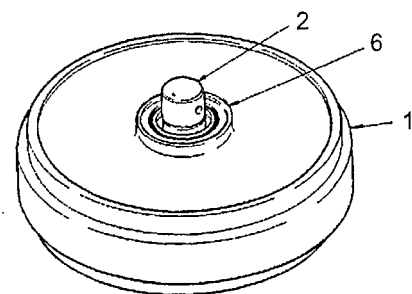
Inserting idler (1) and installing floating seal (6)
